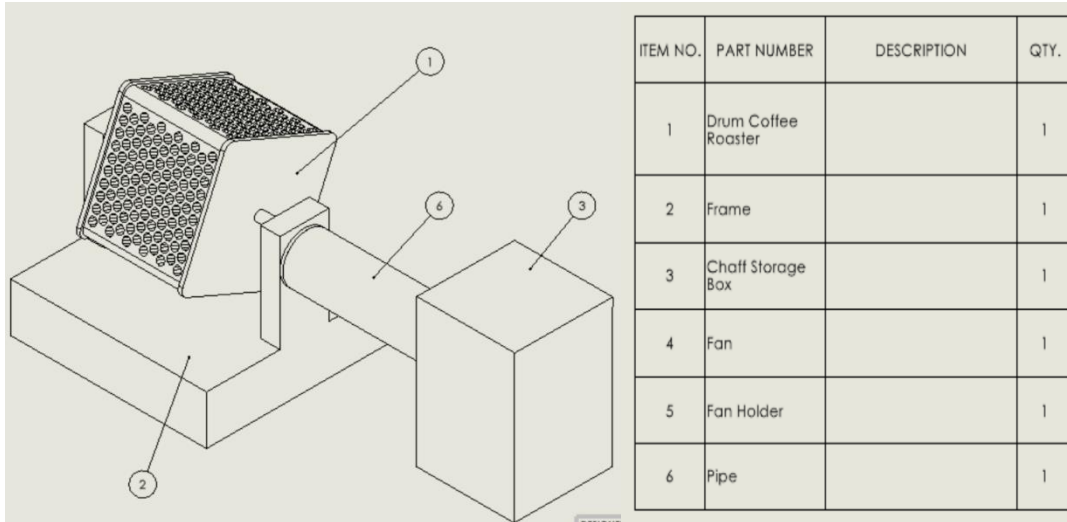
3D model of the chaff collector machine assemble with the drum coffee roaster machine
